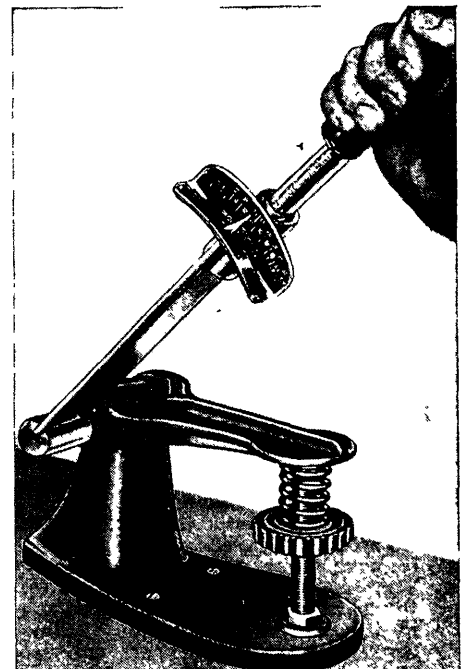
Fixture and torque wrench for checking valve spring pressure. 1935-52
